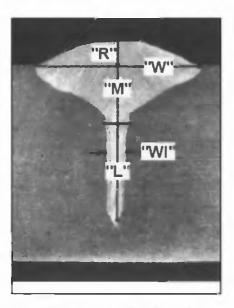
Nomenclature of weld bead dimensions $(5\times)$.
